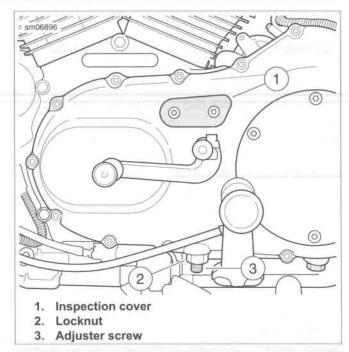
Primary Chain Inspection Cover and Adjuster
